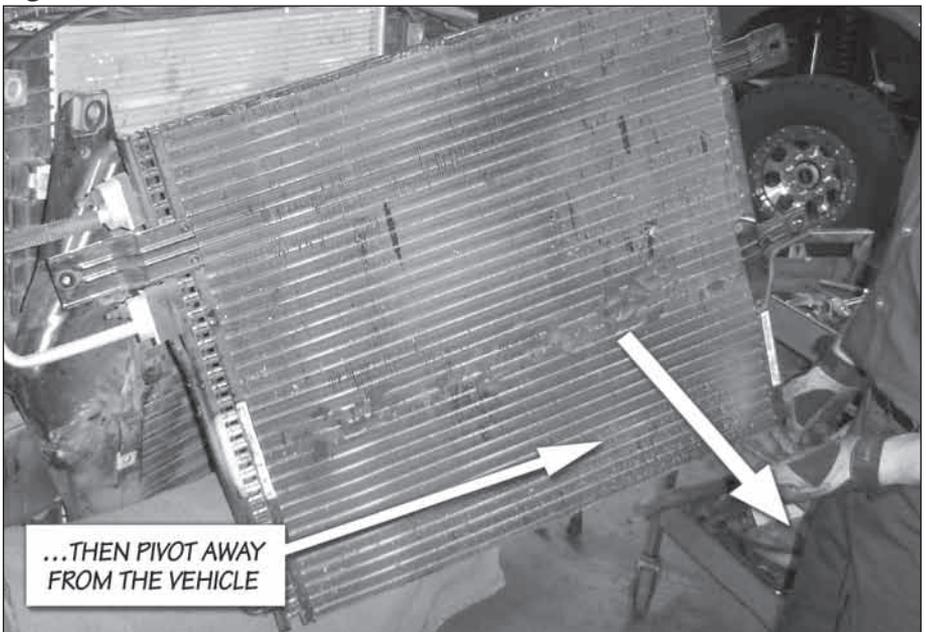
Relocation of the Upper Driver Side A/C Condenser Mounting Bracket
